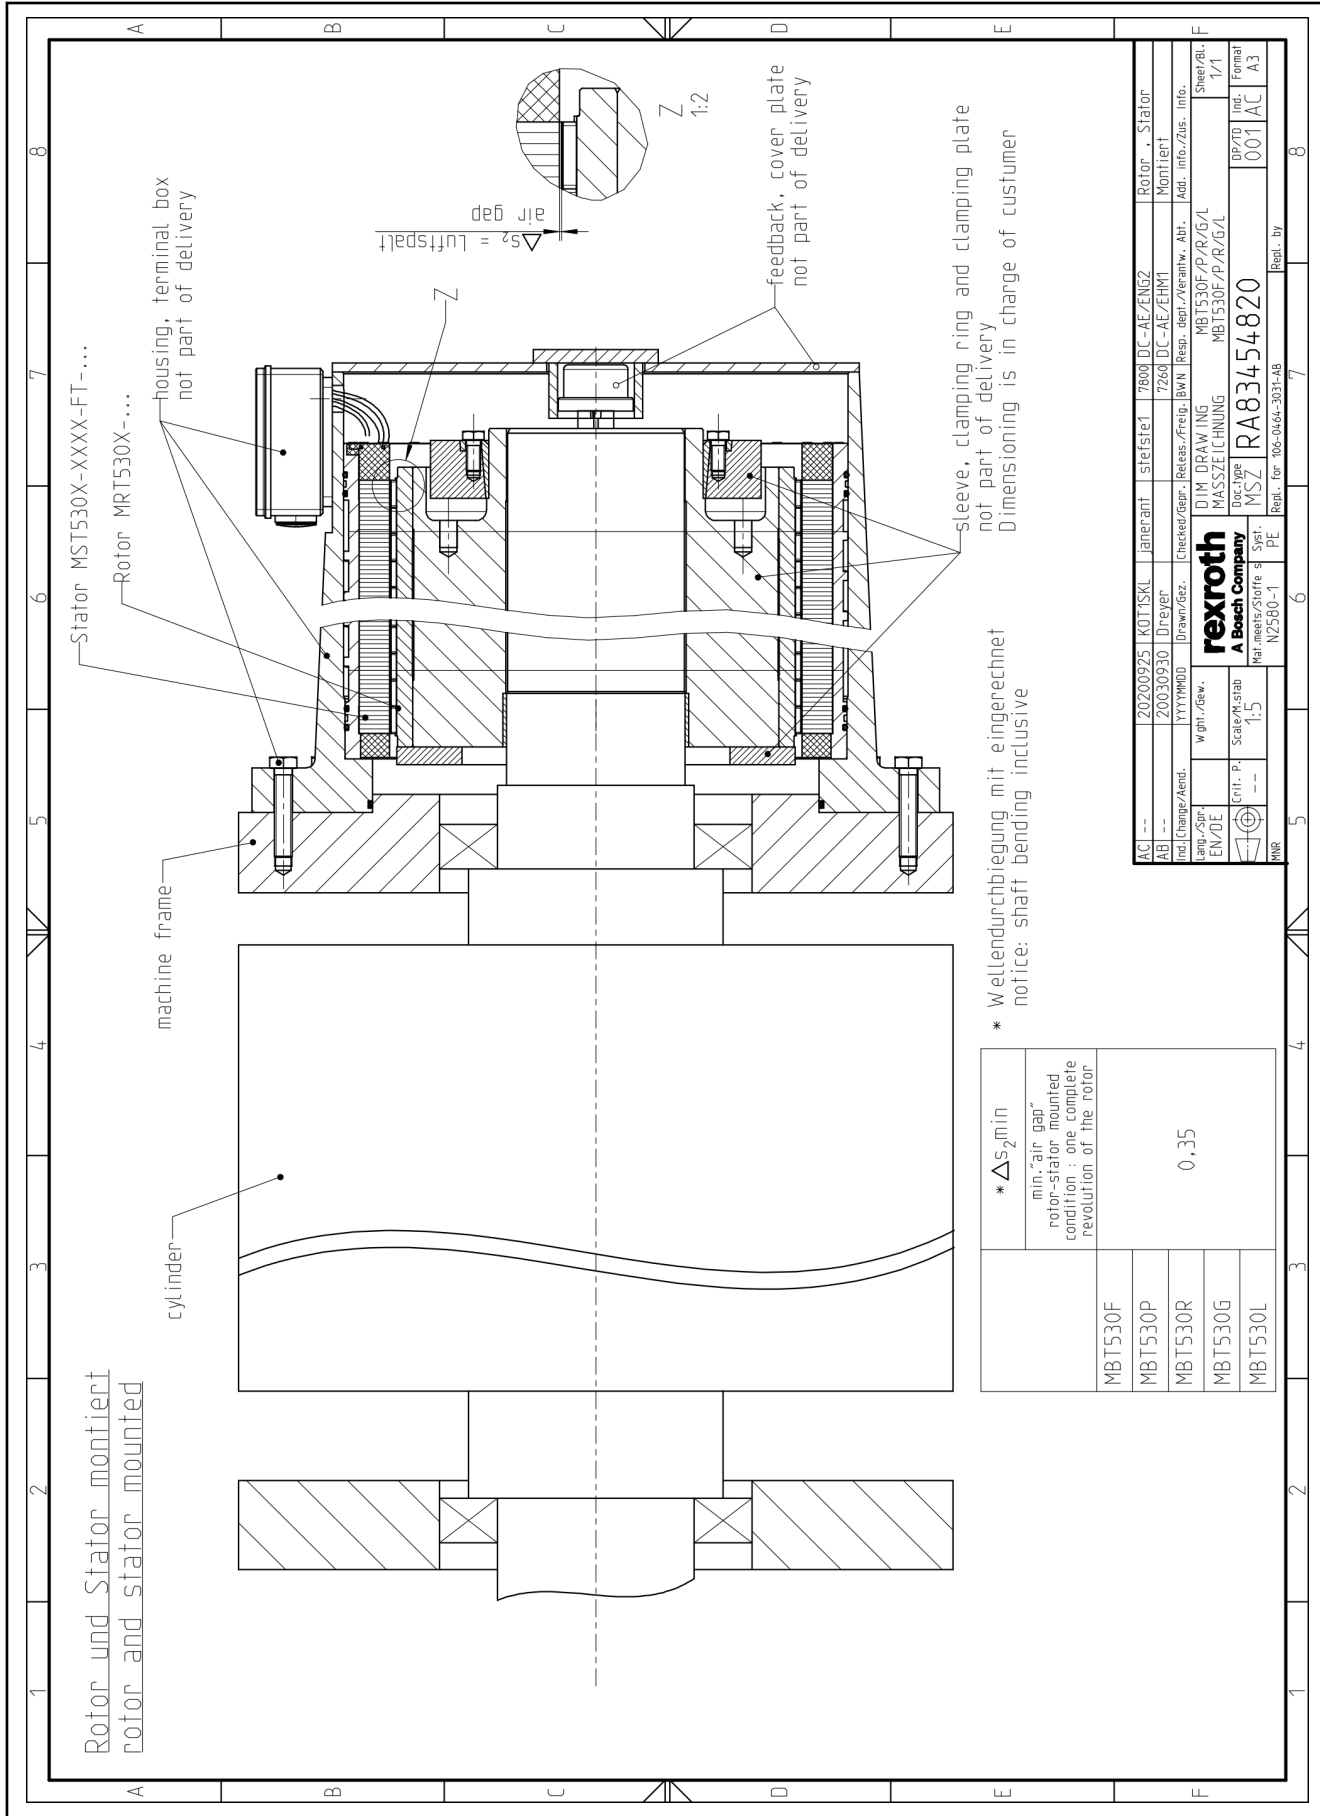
Frame size 530F/ -G/ -L/ -P/ -R with housing, mounted
